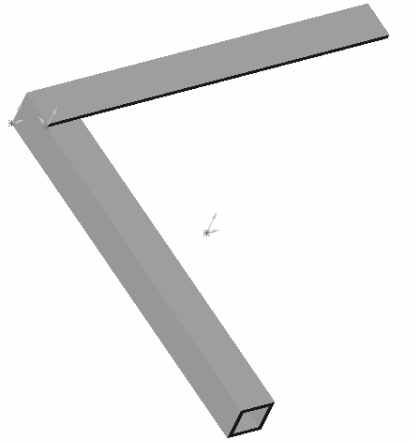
Elbow joint of extruded beams: 3D solid view
